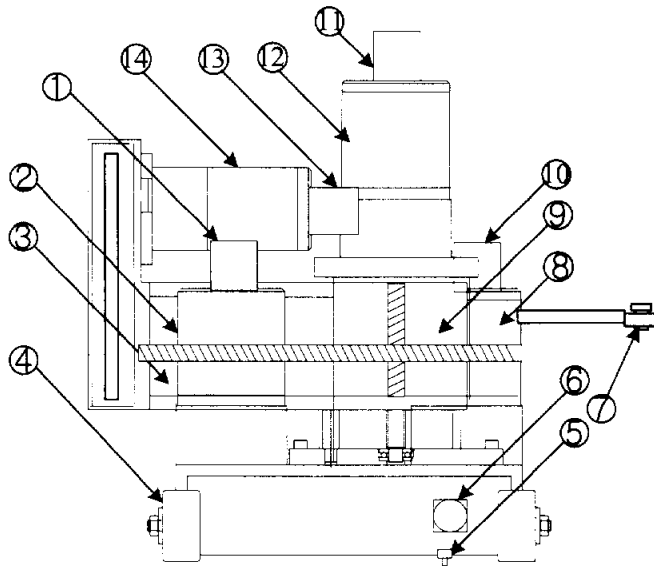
The developed welding mobile robot for smooth curved welding
